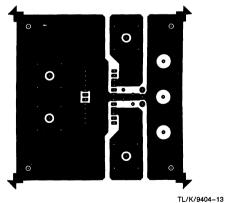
LH4266, Recommended Printed Circuit Board Layout
